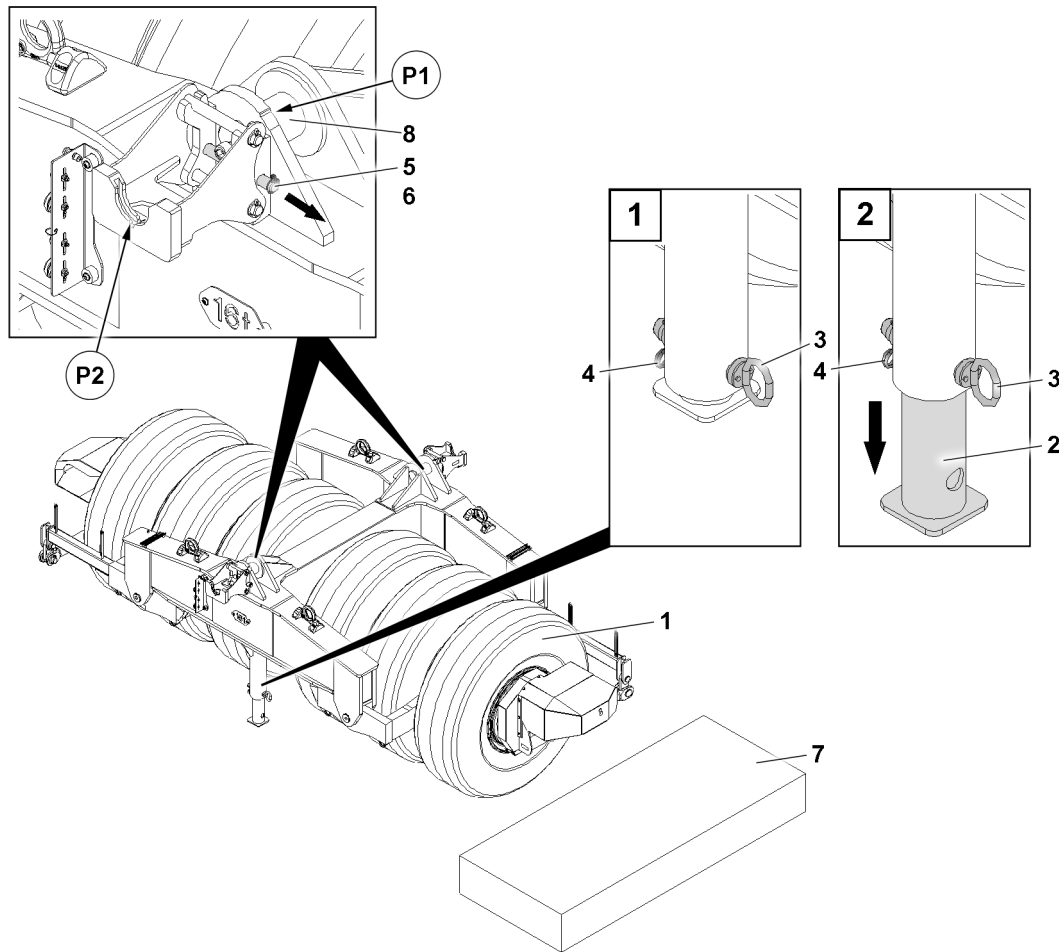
Assembling the first wheel set — assembling the auxiliary supports in the operating position
